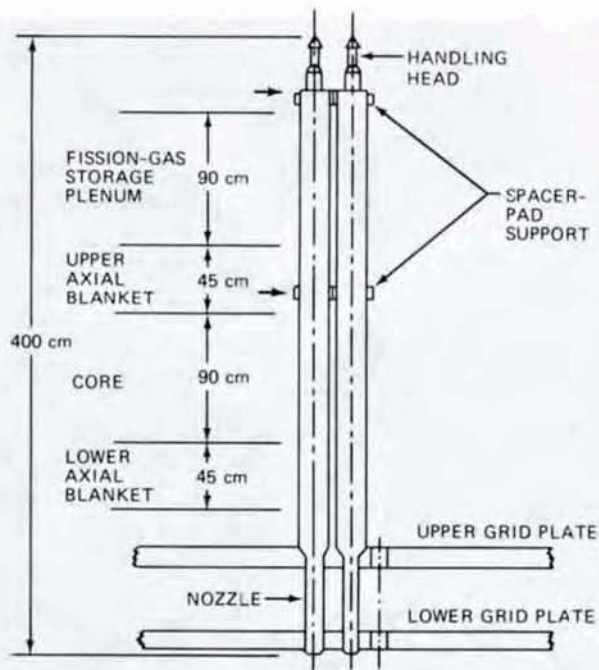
Mounting of fuel assemblies on the grid plates. (After Ref. 17.)
